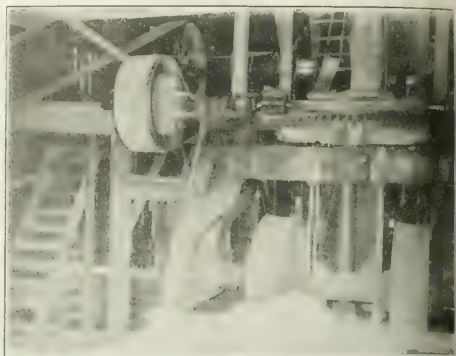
Frost Dry Pan Belted to Line Shaft.
